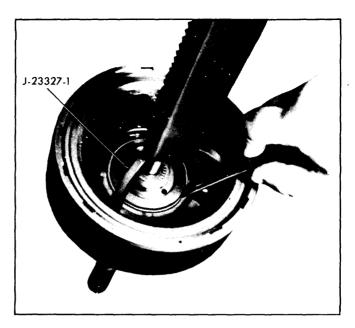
Compressing Direct Clutch Piston Return Seat seal.
